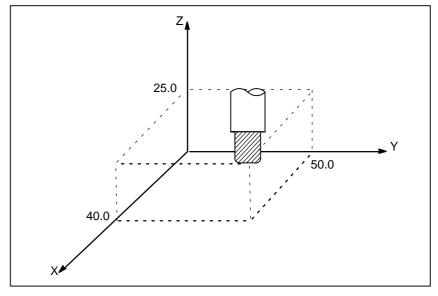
Tool position specified by X40.0Y50.0Z25.0
